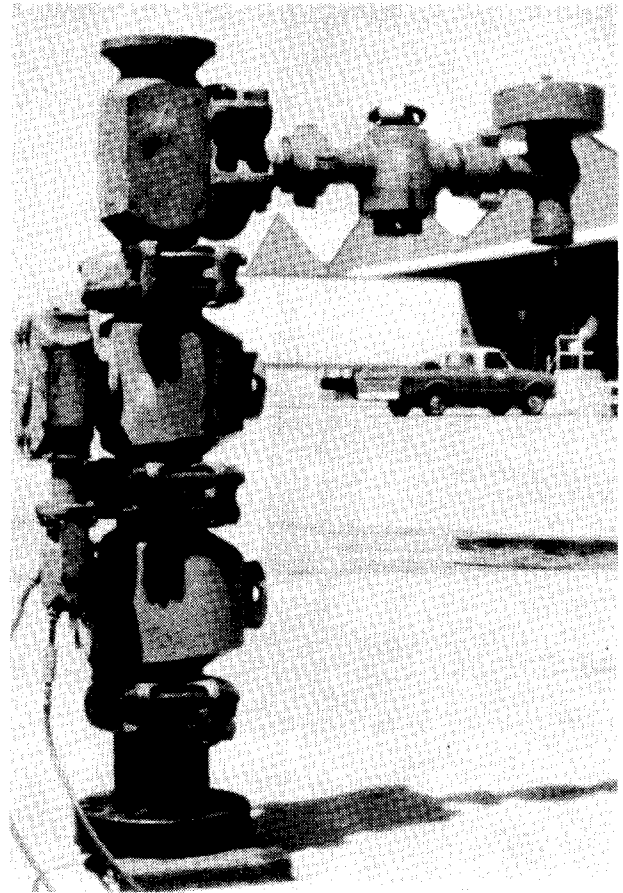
THIS IS A 20,000 PSI WORKING PRESSURE 2-9/16" BORE UPPER RUN ASSEMBLY READY TO BE INSTALLED. IT INCLUDES A HIGH TENSILE STRENGTH ADAPTER FLANGE WITH 10,000 PSI FLANGE DIMENSIONS; ONE MANUAL, AND ONE REMOTELY OPERATED VALVE; WING VALVE; AND A 20,000 PSI PNEUMATICALLY OPERATED CHOKER.
